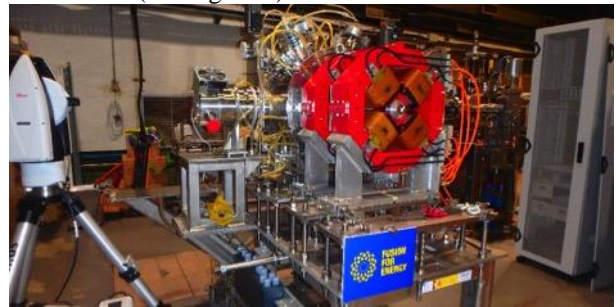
Assembly and alignment of the magnets on the MEBT frame.
